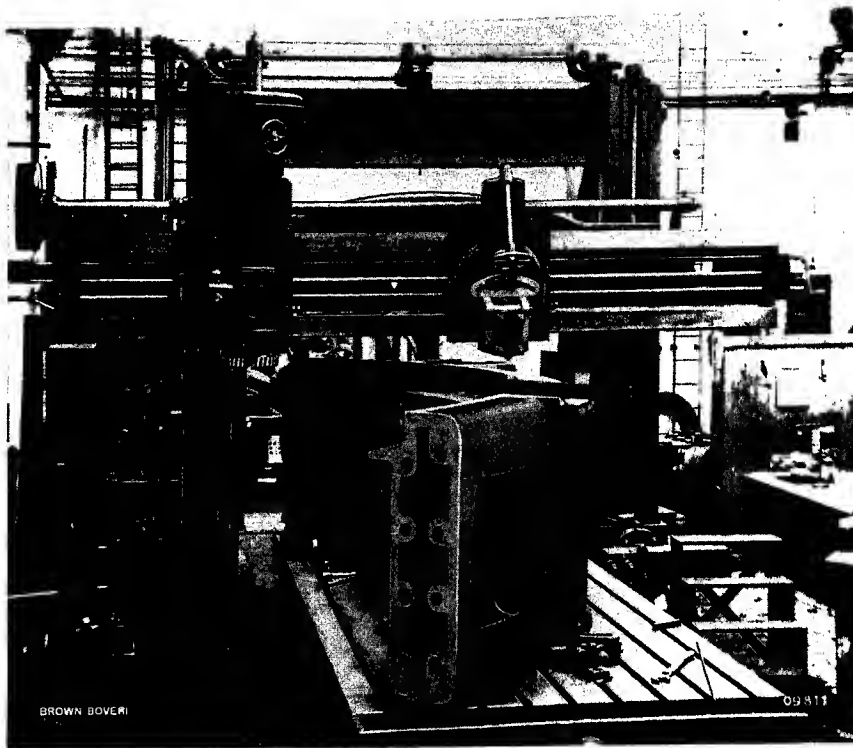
Machining a section of the stator frame of an alternator, 7050 kVA, 83.3 r. p. m., for the Gösen Power Station of the Olten-Aarburg Electricity Supply Co., see also Fig. 89.
